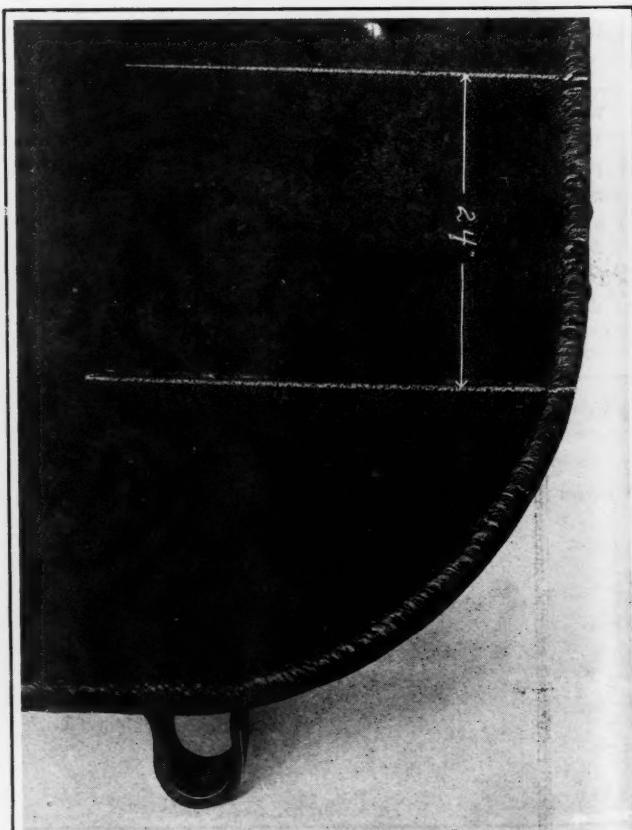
View of Seam in Tank where Bottom is welded to Shell
